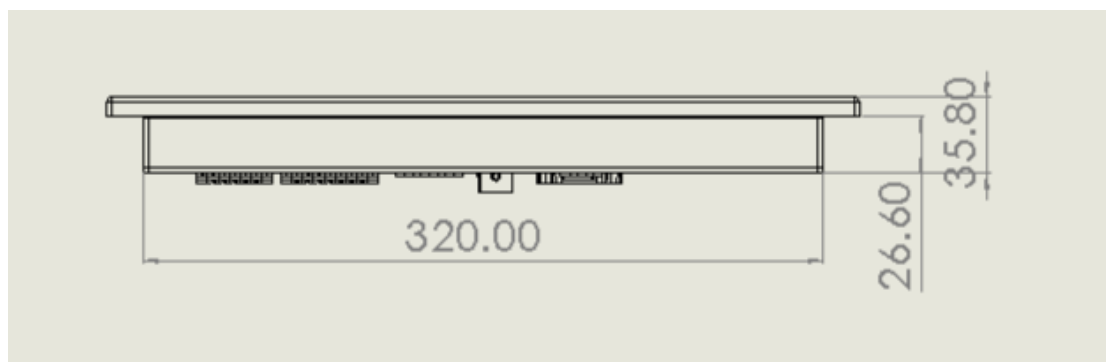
Installation dimensions of LX4510 H (bottom view)
